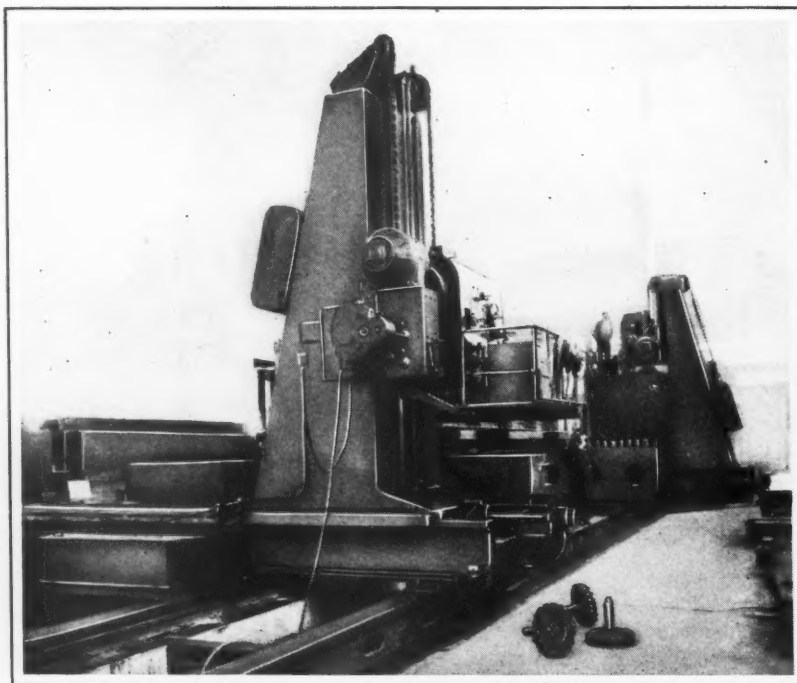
Sellers Special Boring, Drilling and Milling Machine for Finishing Ends of Bridge Section, etc.
